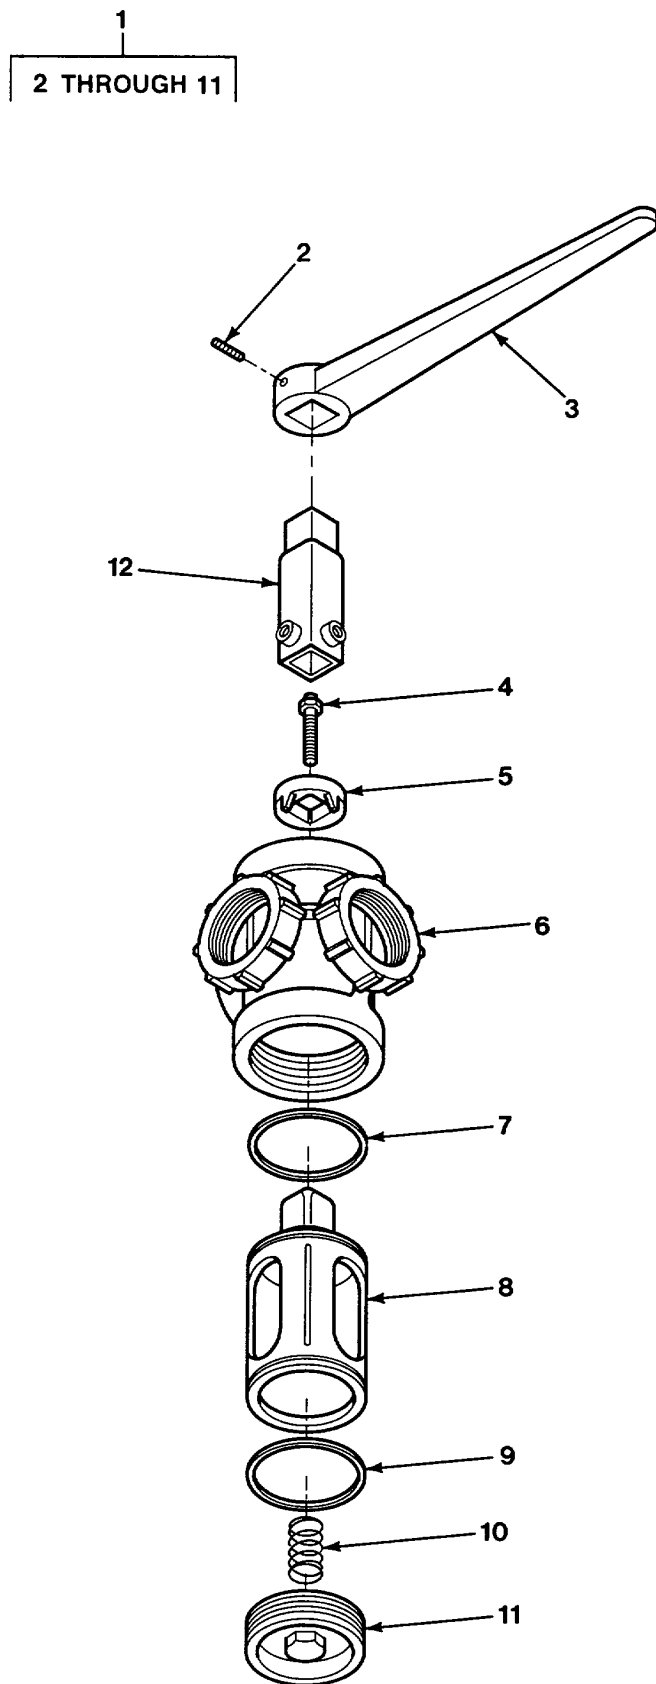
TWO AND ONE HALF INCH VALVE ASSEMBLY
